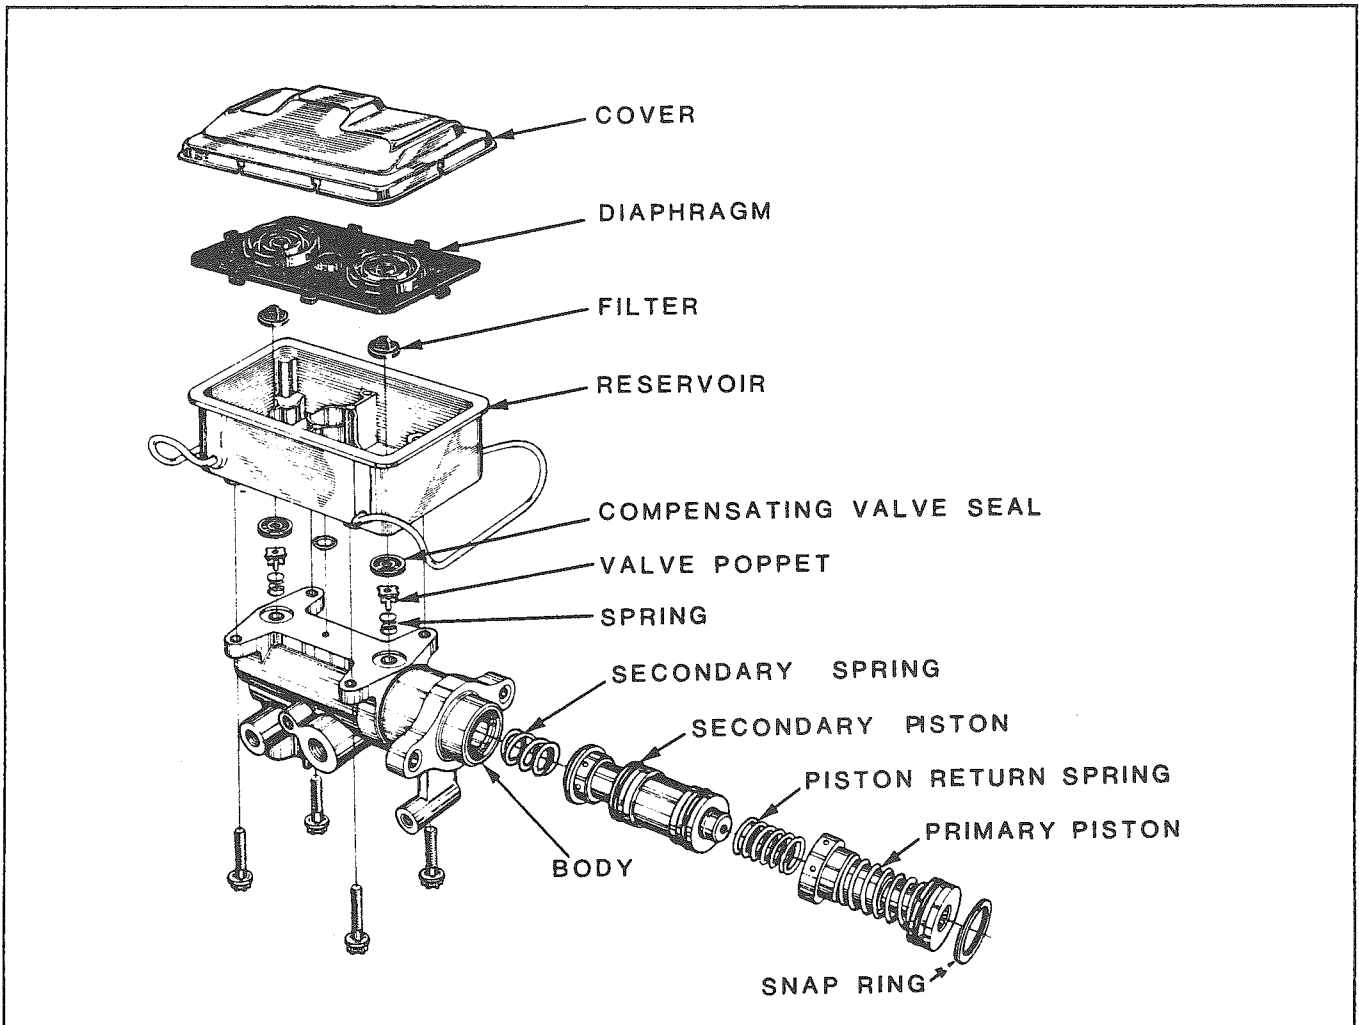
Bendix Mini-Master Cylinder – Exploded View
